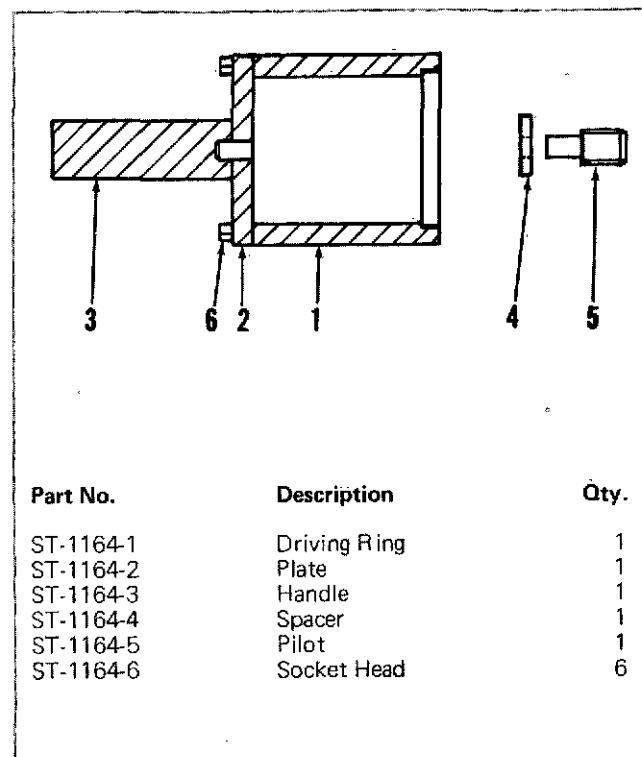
, V414223. ST-1164 Cross-section and assembly
